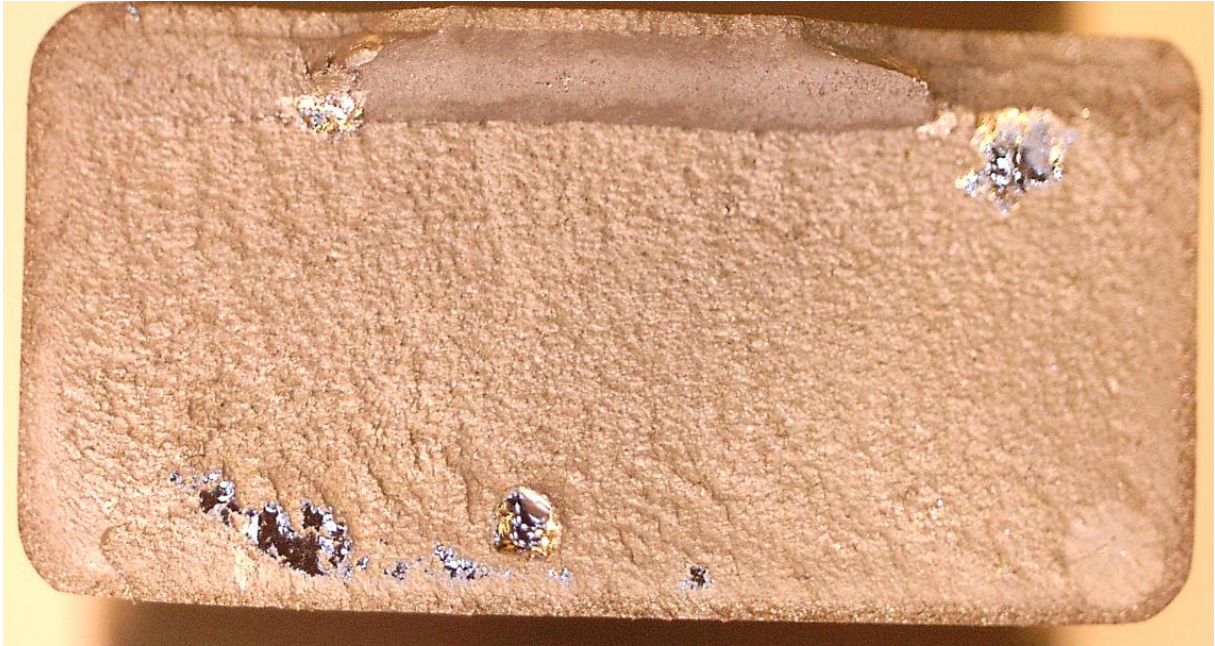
Fracture surface of specimen IT180-12 (Note "Fisheye" at lower right. Dark spots are from impacts on extensometer clips that entering crack during final failure cycles)
